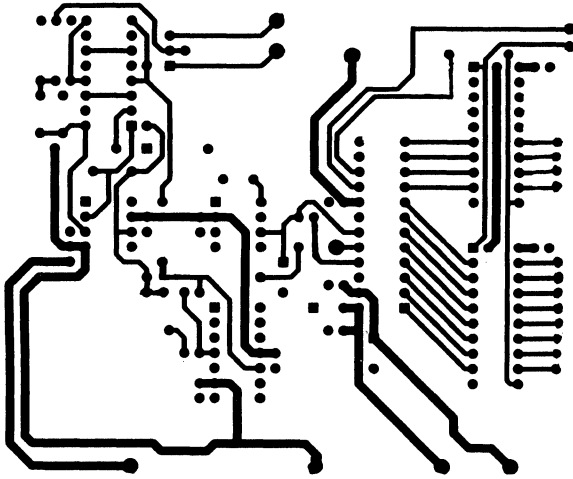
PCB Solder Side Layout for Figures 5, 10 and 13
